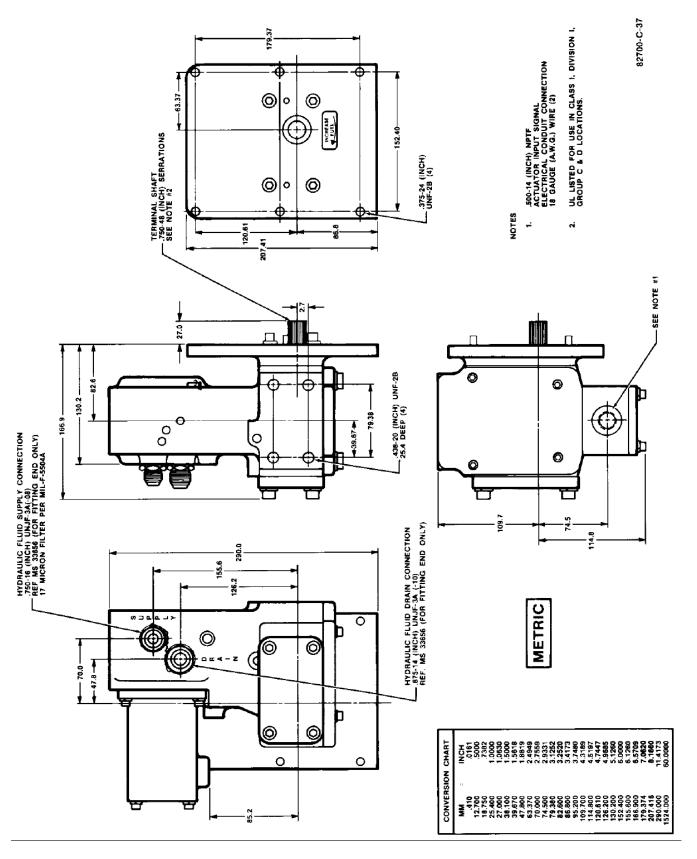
Outline Drawing, TM-55 Integrating Actuator
